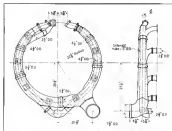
Exhaust manifold for White Gopher 3000 cc. 4-cyl. Side elevation shows inlet tube built-in with every level located behind engine reference. This shows a supply of dry air under all operating conditions. Also show the single exhaust outlet in the lower right corner.
